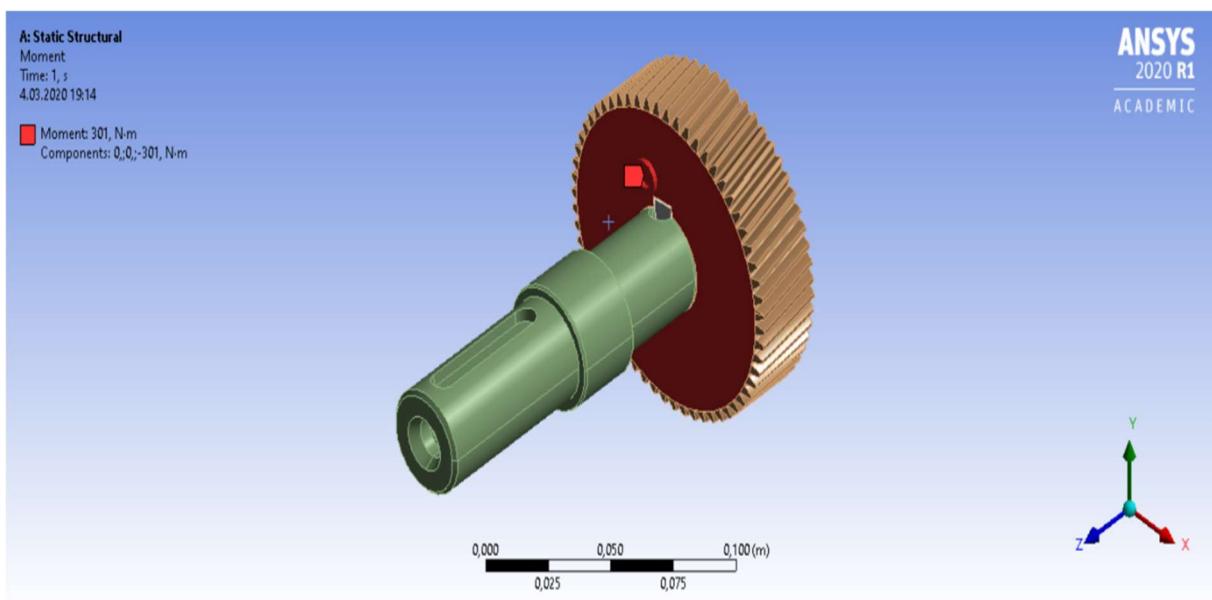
Z5-Z6 gears (Z6 fixed)
